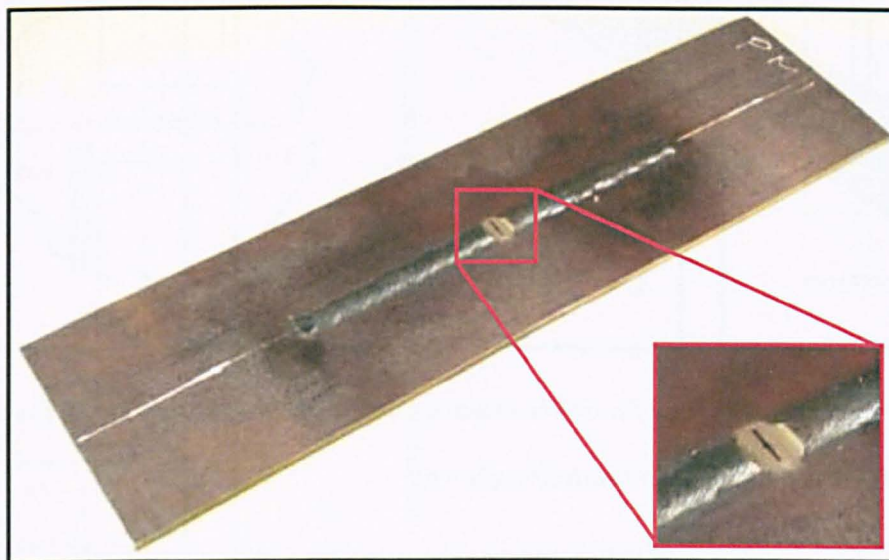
Steel CCT specimen with a 300mm long weld bead (EDM notch also shown).
